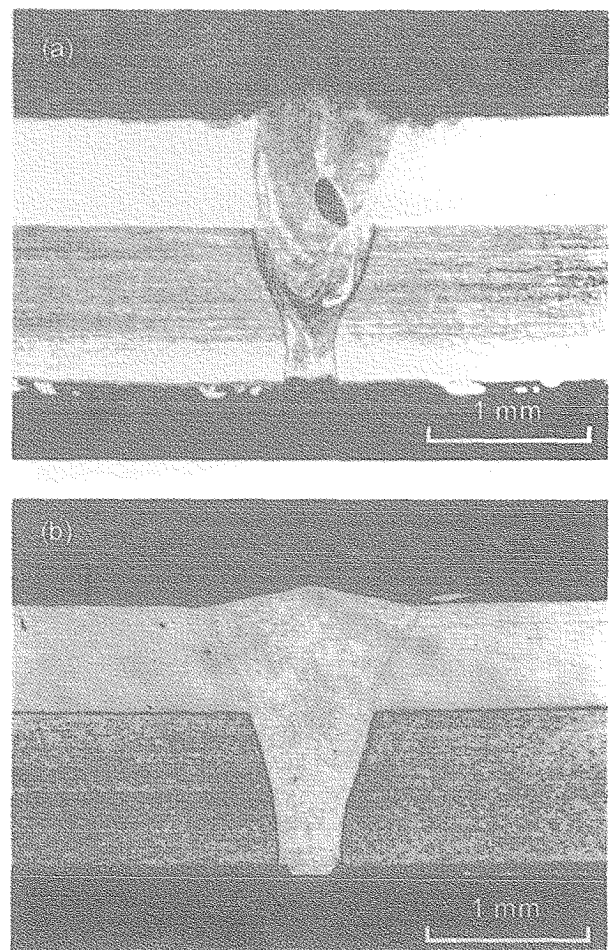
Typical examples of cross sections taken from laser lap welds produced using 15 l/min Helium and different gap distances ((a) Gap: 0 mm, (b) Gap: 0.025 mm)
